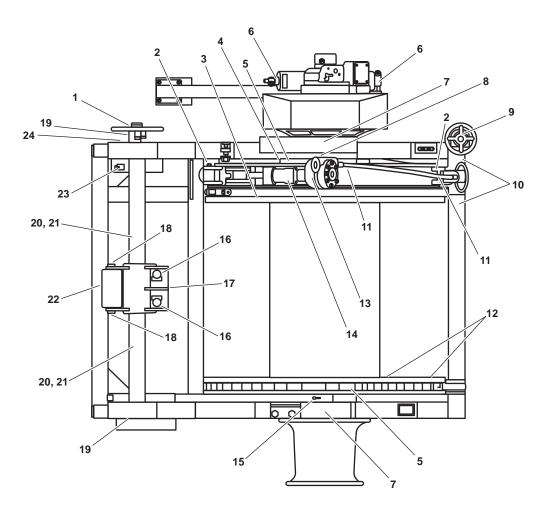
Towing Machine Lubrication Points (Starboard Side Shown, Port Machine Opposite Hand)
